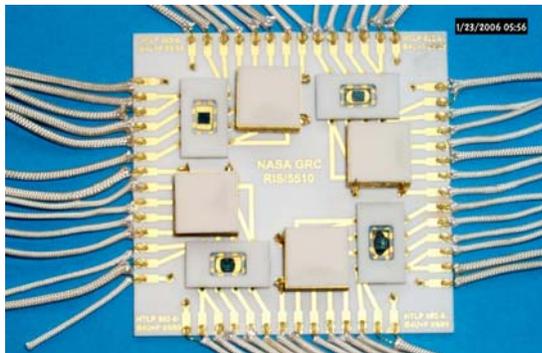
The test assembly of 500°C amplifiers based on SiC MESFETs and aluminum oxide packaging system. The test assembly includes four test circuits.
